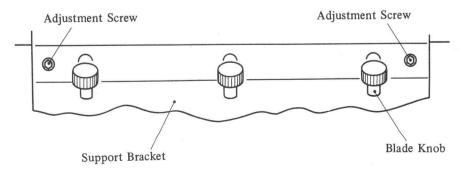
Adjustment of Cleaner Blade Pressure (B)
